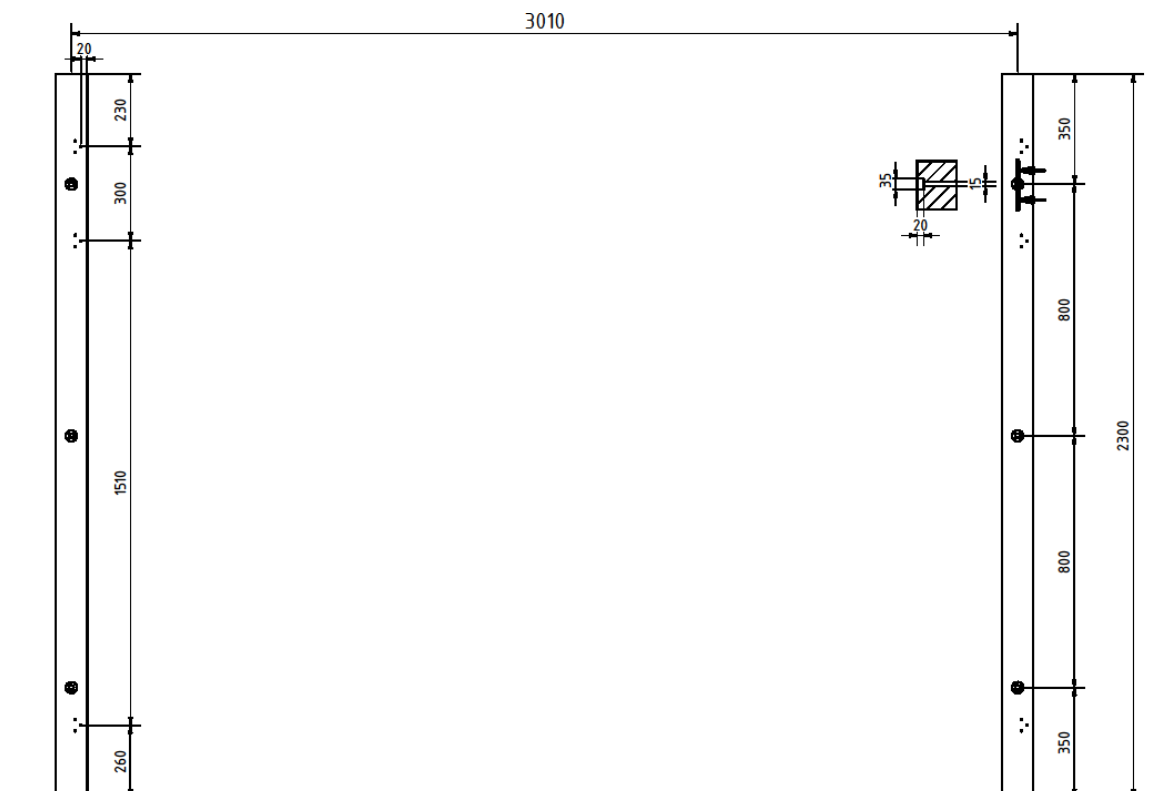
Drilling dimensions for the hinges (on the left) and wall beams (on the right)
